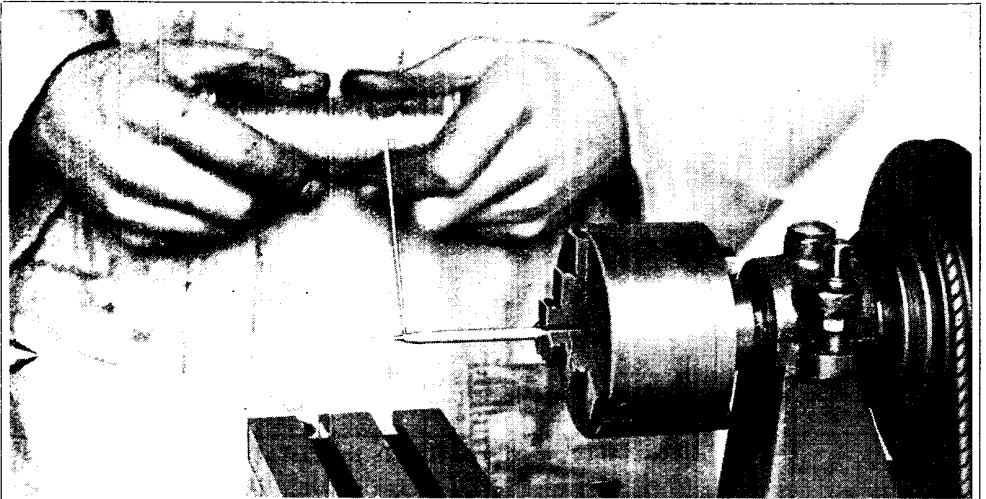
A lathe is used in winding the resistance coils. The wire is wound on a steel rod former
